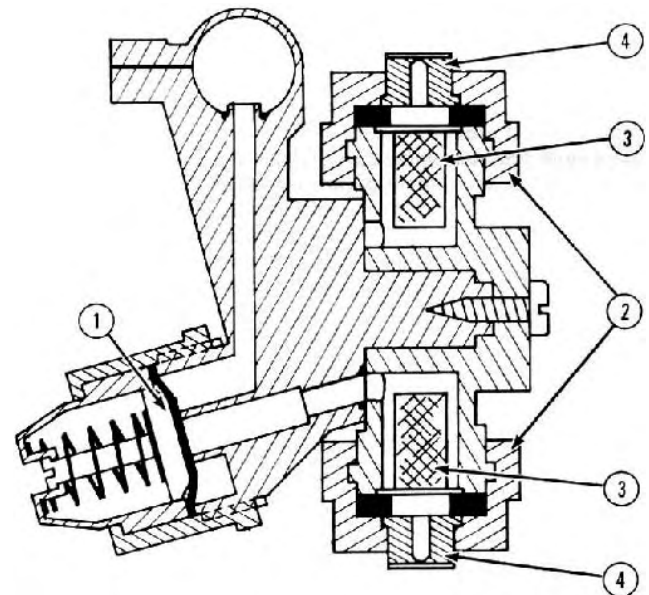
Nozzle Body Assembly: (1) Diaphragm Check Valve, (2) Nozzle Caps, (3) Nozzle Strainers, (4) Nozzle Tips.
